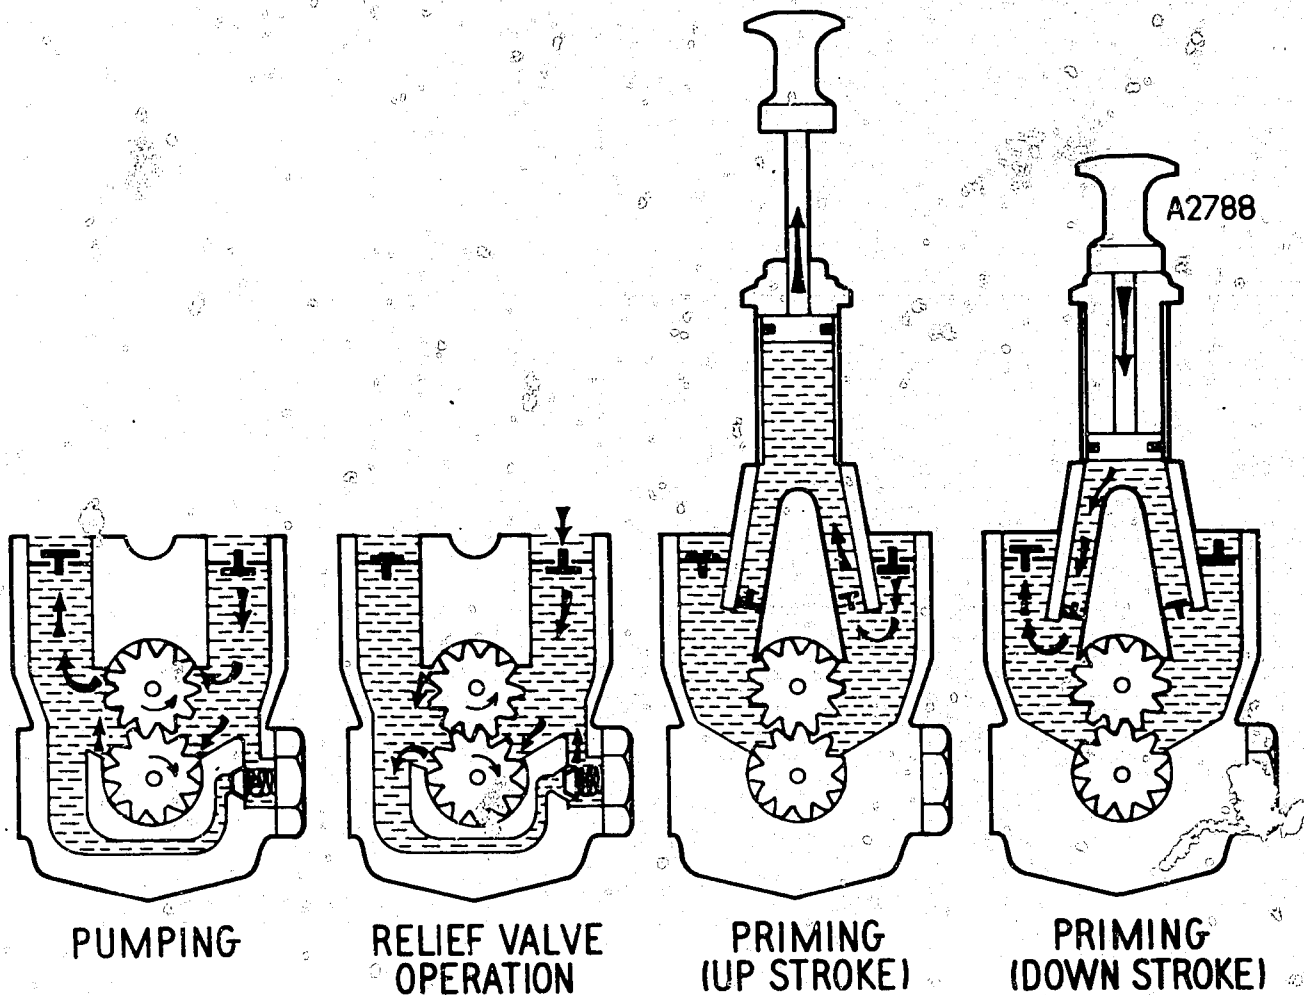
SUPPLY PUMP AND HAND PRIMER OPERATION
